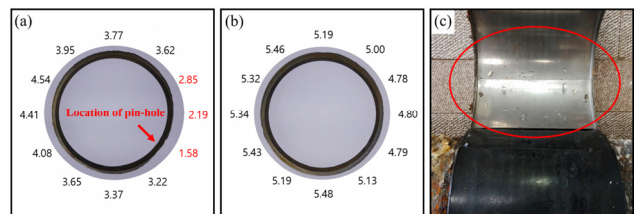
Thickness measurements for (a) damaged part (specimen 15 shown in Fig. 1), (b) undamaged part (specimen 16 shown in Fig. 1), and (c) water existed between metal clamp and HDPE pad (unit: mm).
